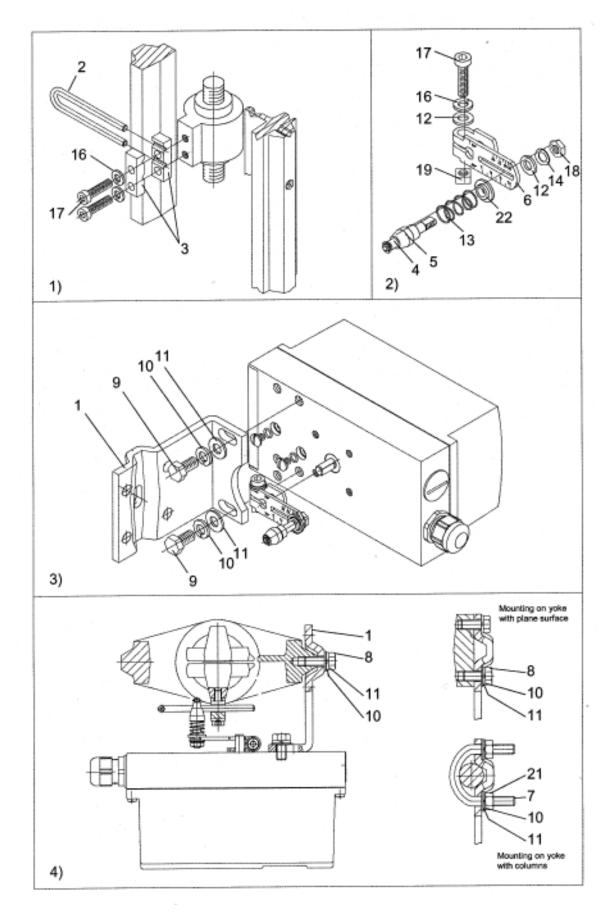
Assembly sequence (Linear Actuator) IEC 534
